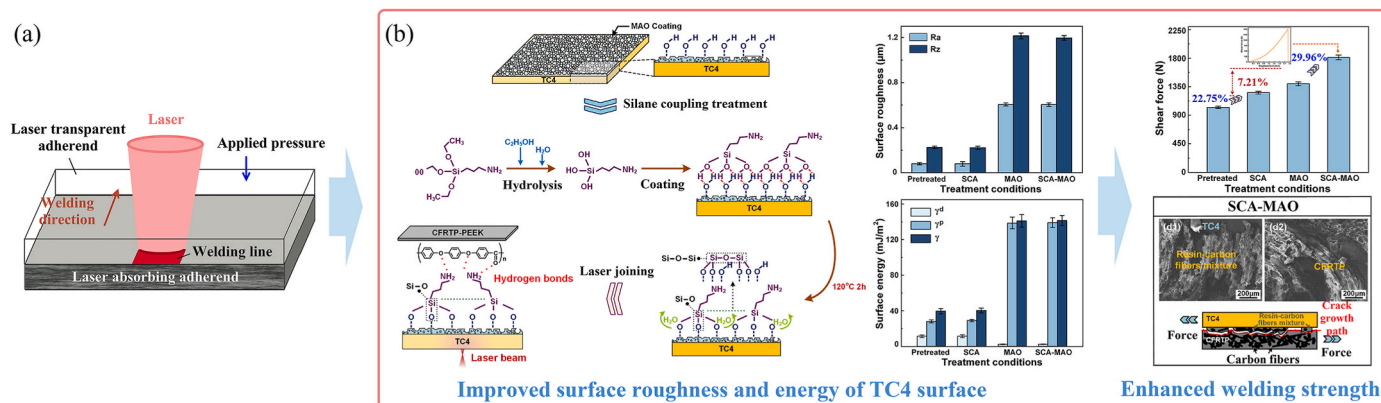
Schematic of (a) the laser welding and (b) improved surface and energy of TC4 surface and correspondingly enhanced welding strength of the TPC-TC4 hybrid joints [175].
